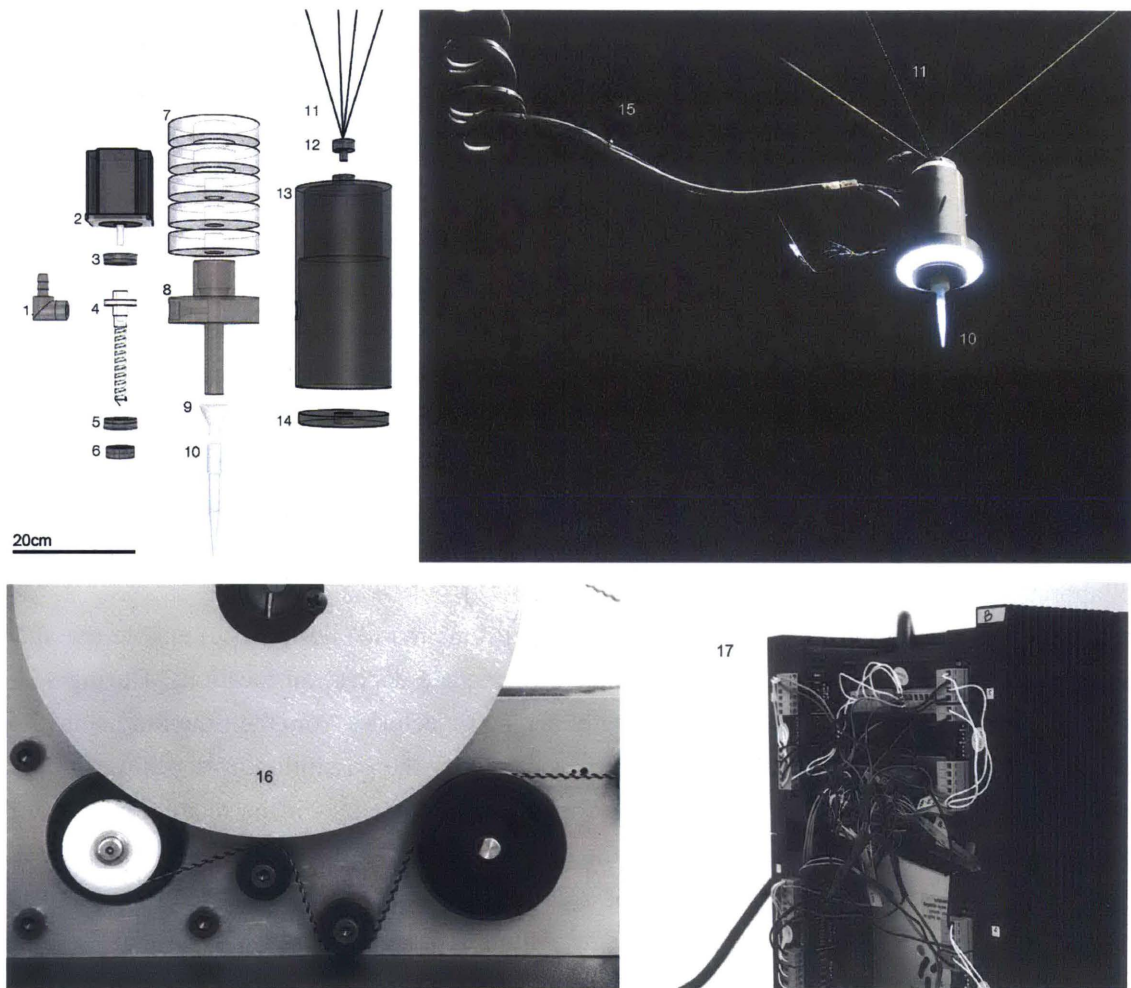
Electro-mechanical implementation for a cable-suspended construction system. The extruder head assembly is composed of material inlet (1), stepper motor (2), rubber seal (3), custom screw (4), rubber seal (5), U seal (6), lead weights (7), screw mixing chamber (8), HDPE custom nozzle (9), pipette tip (10), synchronesh cable (11), cable fixture (12), delrin housing (13), and end cap (14). Material is fed via hierarchical tubing (15). Spring motor assembly for synchronesh cable (16), and electronic control assembly (17). Figure from DuroRoyo et al. [2015].
